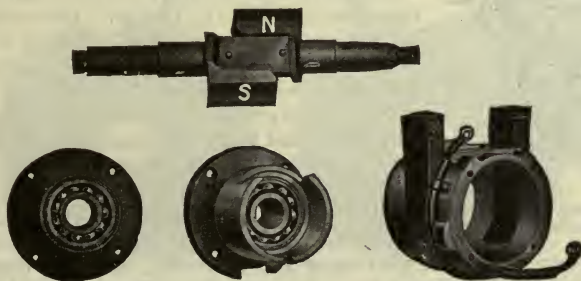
Rotating Poles, Bearing Holders and Field Structure.
